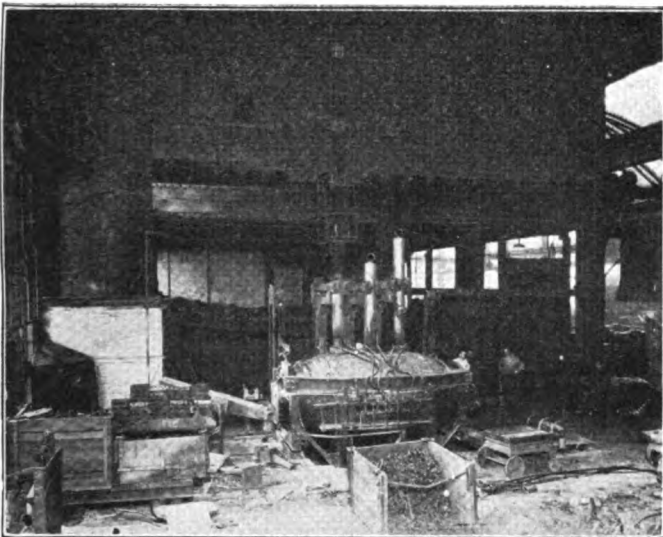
Six-ton Ludlum electric furnace, Trafford City Steel Foundry, Westinghouse Electric and Manufacturing Company.
